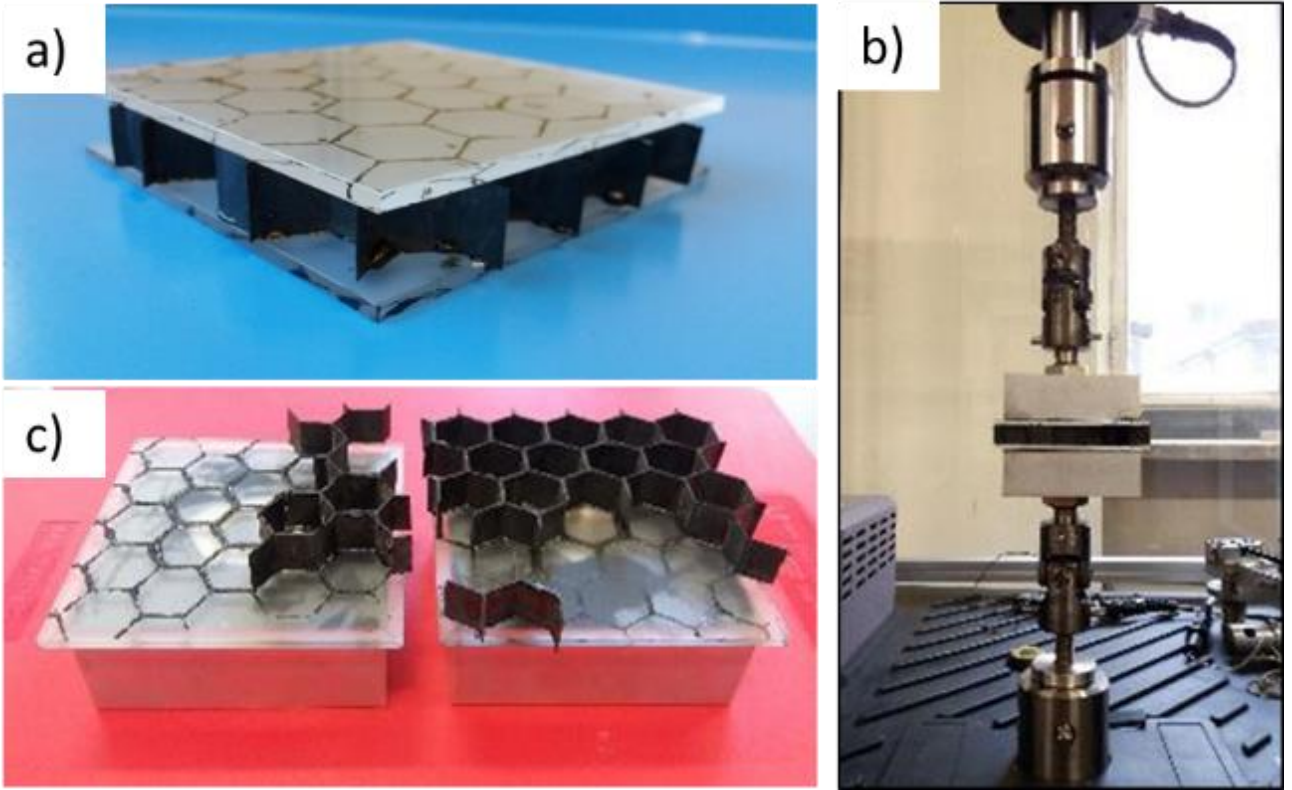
Phenolic resin bonded (PH150) Zerodur™-CFRP honeycomb-Zerodur™ sandwich assembly (150 mm x100 mm) (a) for a shear test (b) and the fracture surface of the sandwiches after a tensile test (c)
